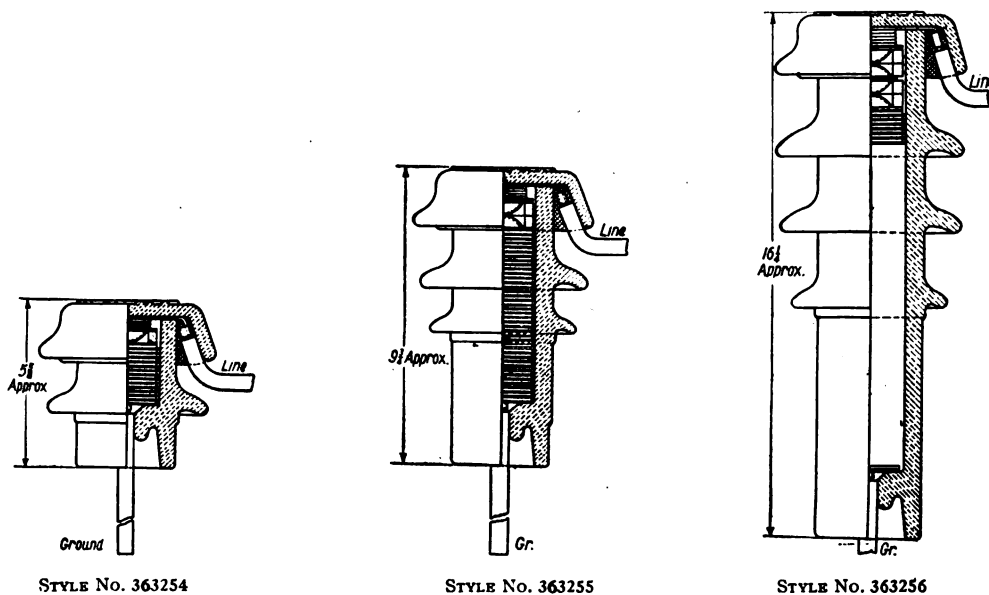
SECTION OF AUTOVALVE ARRESTERS SHOWING INTERNAL CONSTRUCTION
